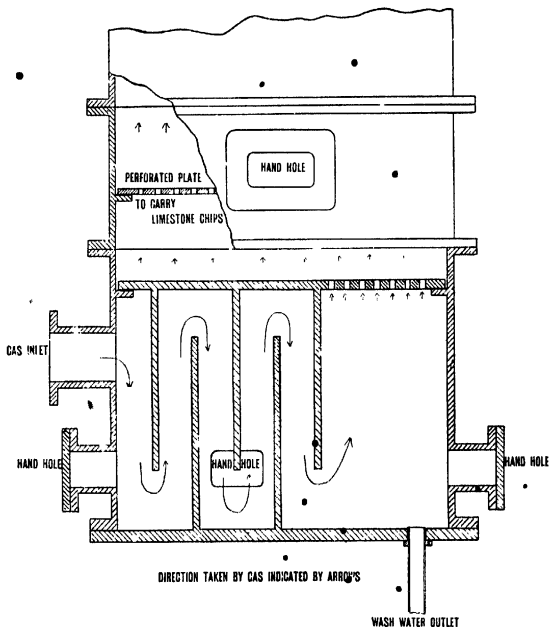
Panting Tower with Dust Separator built in Bottom.
